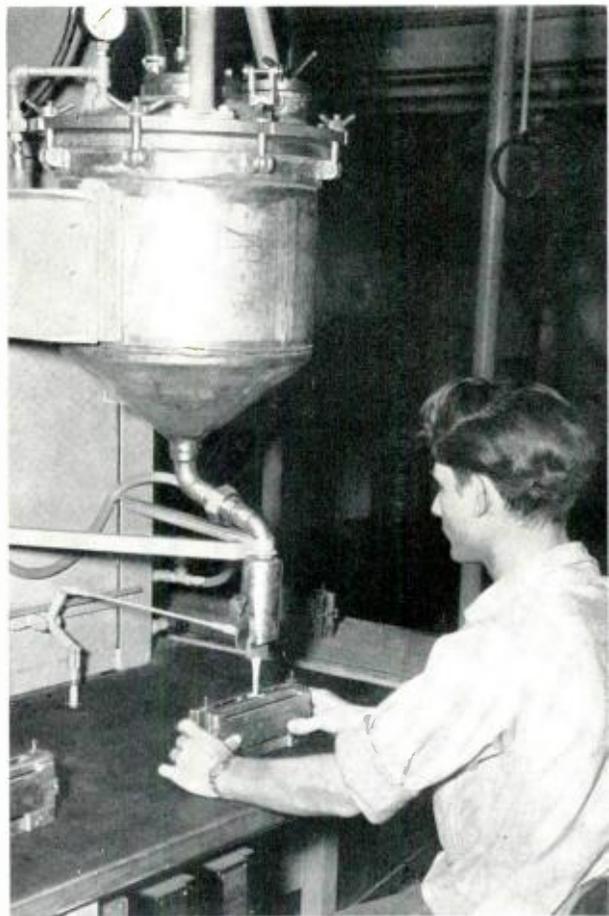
After the solid sides of the mold have been clamped on, the casting compound is poured in this way. The operator is Donald F. Beck.
